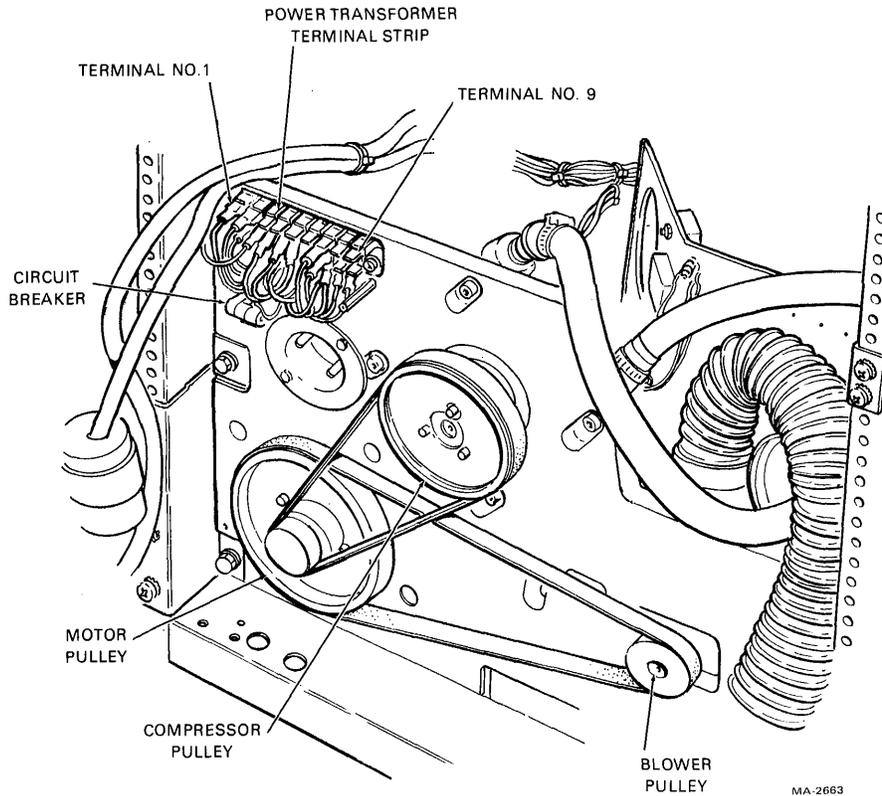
Rear of Power Pack with Pulley Cover Removed
